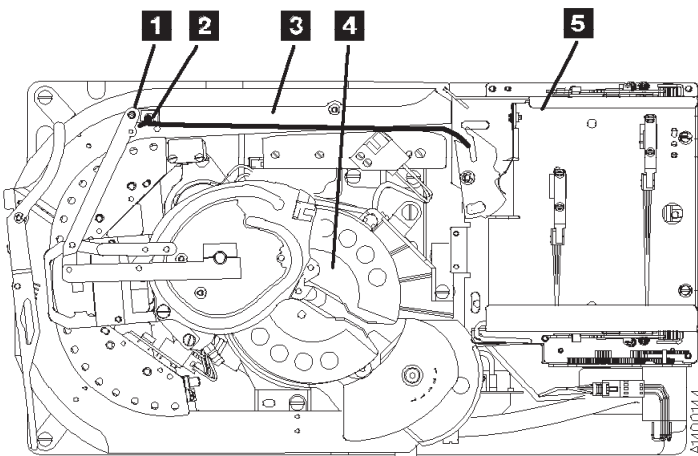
Example of Leader Block and Threader Pin Stopped in Tape Path
